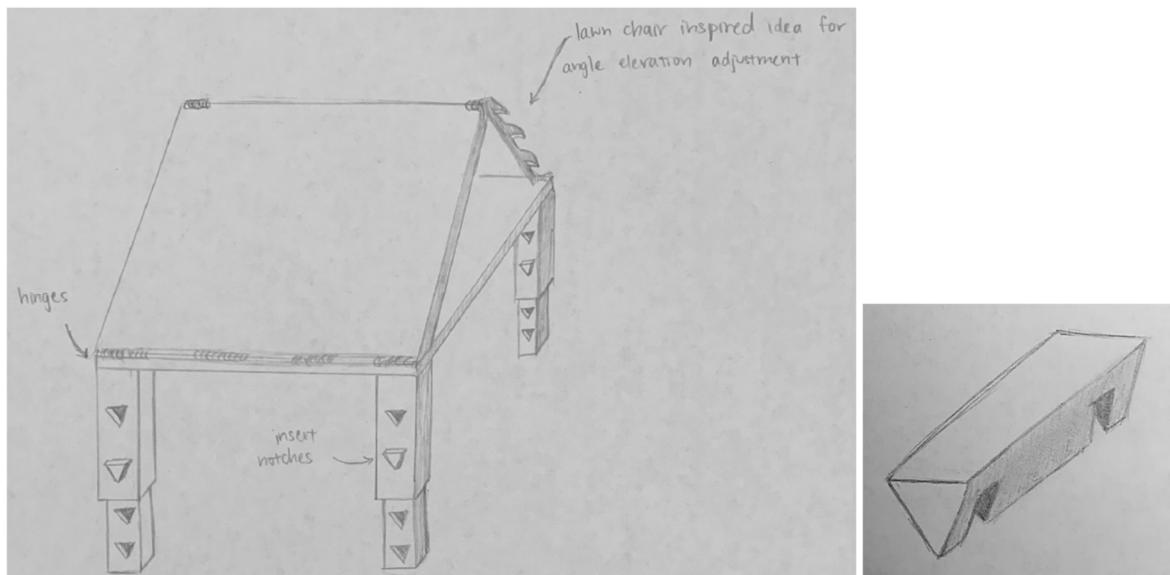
For this design, I thought of ways to maximize simplicity and durability. However, the extra parts would be extremely inconvenient. It would be challenging to keep track of so many components.
